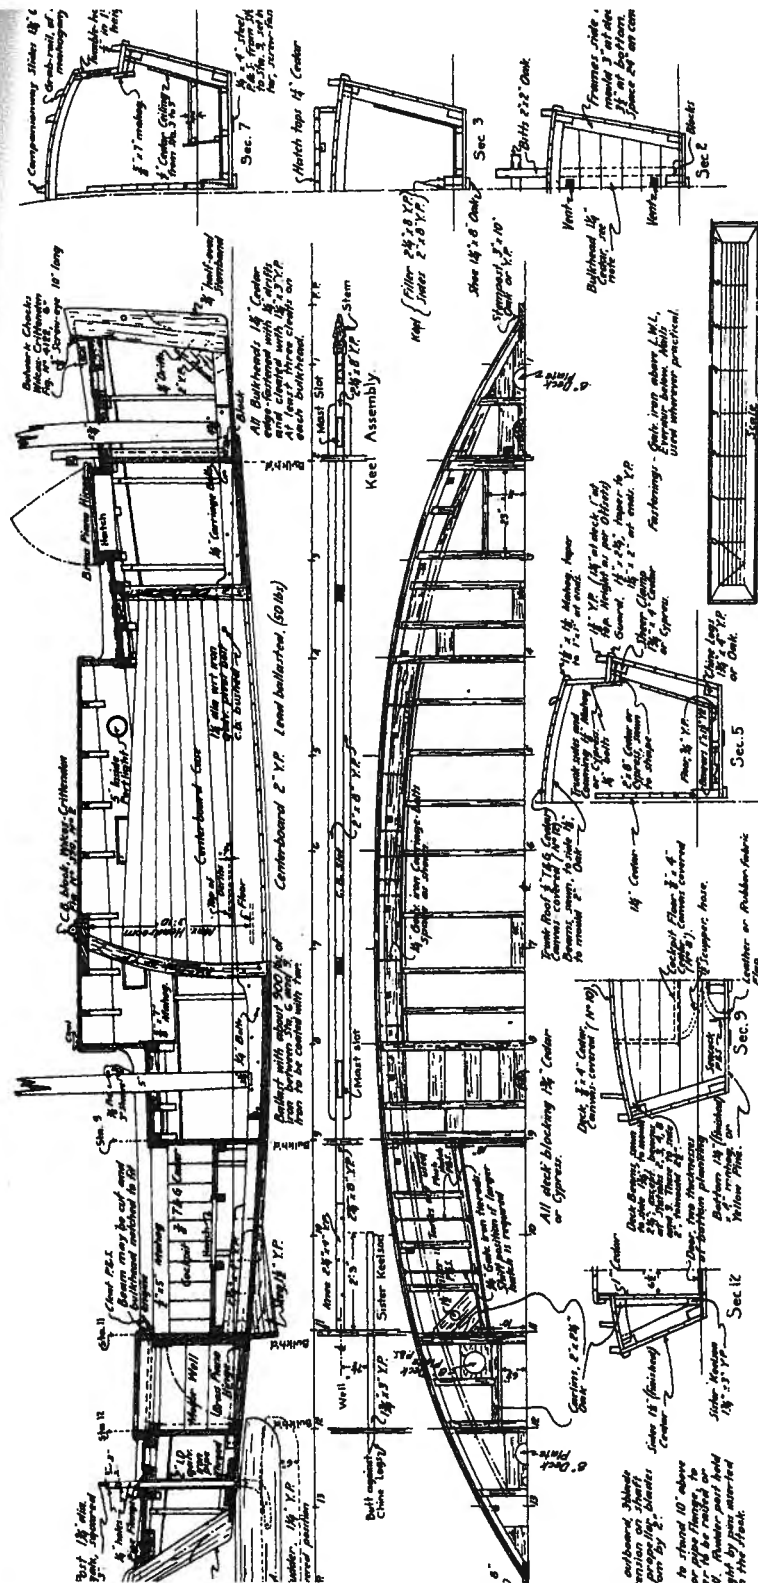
Construction Plans for a 30-Foot Sharpie Cruiser
